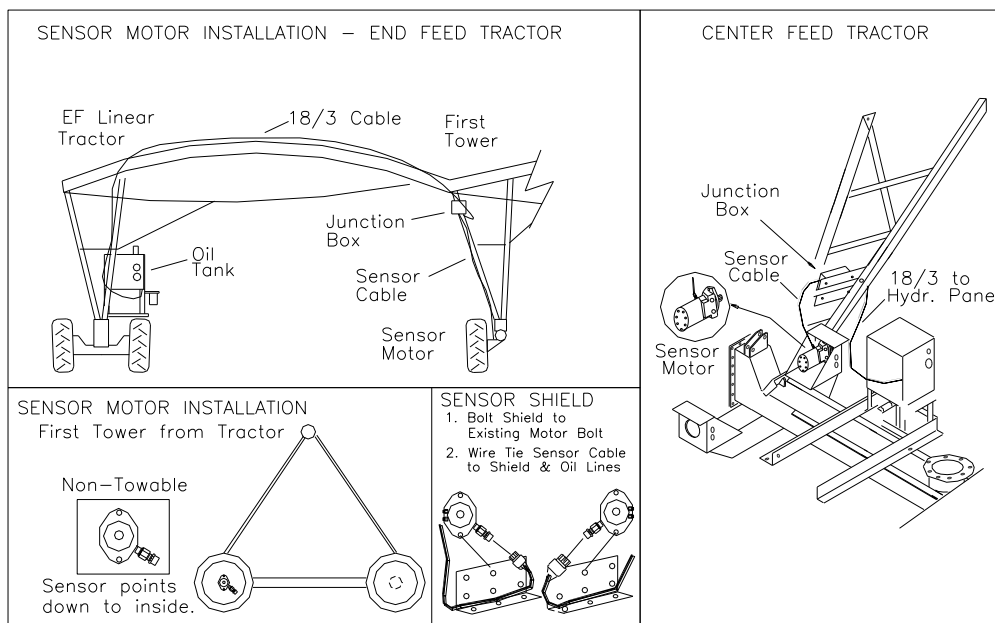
Speed Sensor Motor Location – Center Feed & End Feed Tractors
